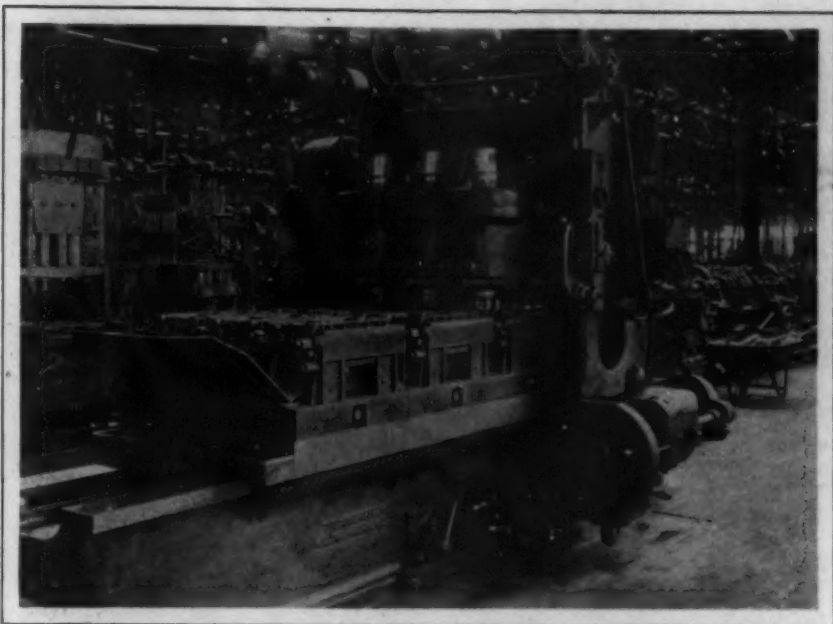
Typical Set-Up of Cylinders for Surfacing on a Milling Machine
